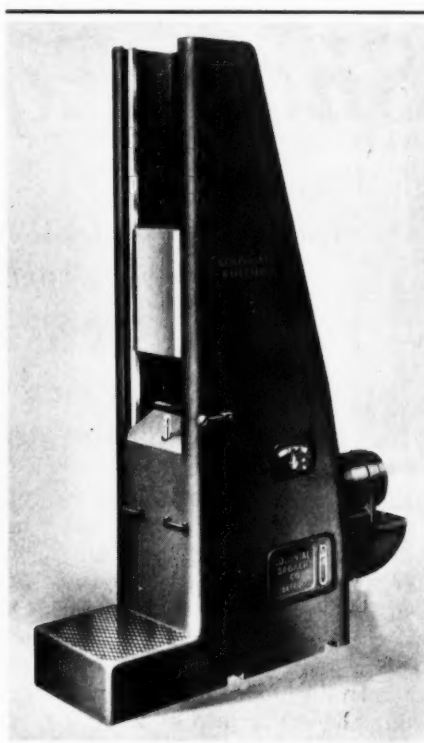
Heavy-duty "Pullup" Machine for Large Gears, Parts with Long Holes, etc.
